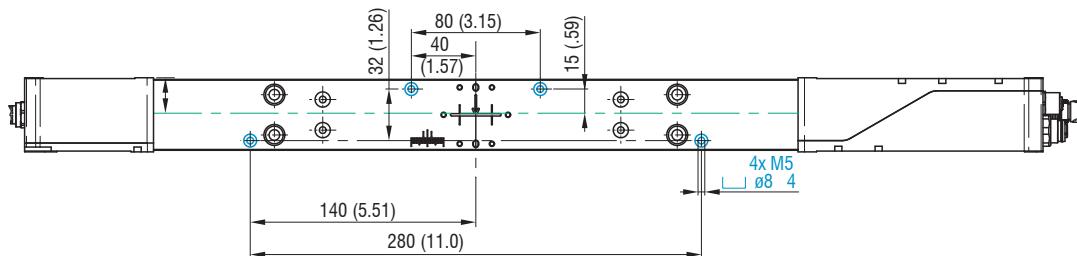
Dimensional drawing of mounting rail ODC2700-40(002), standard mounting
